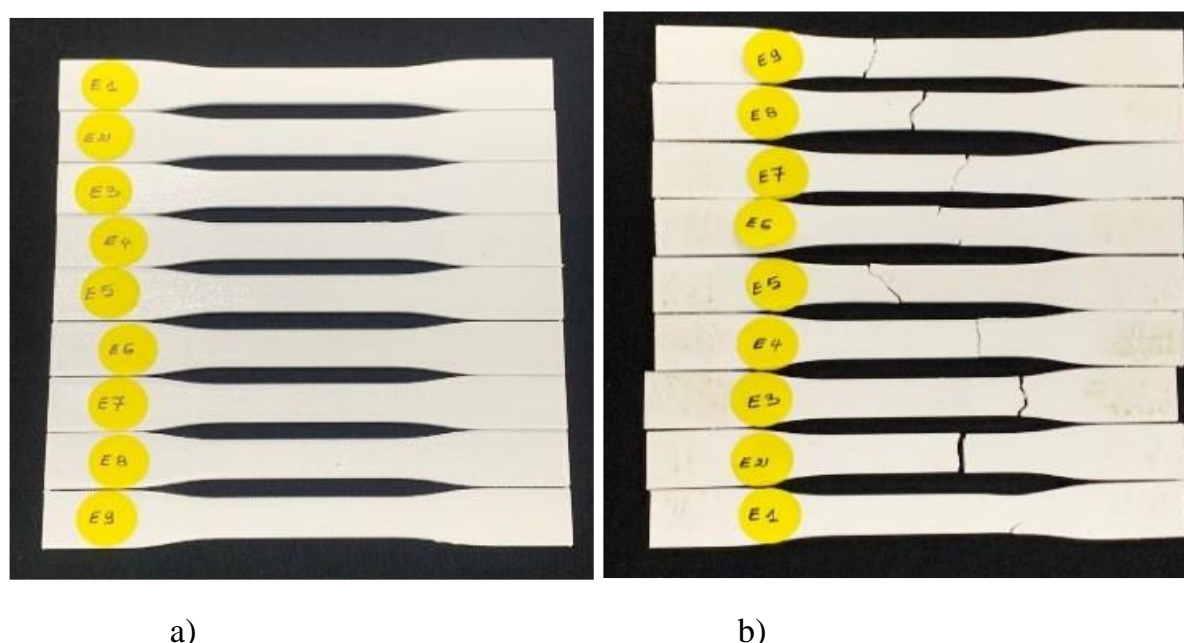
(a) The appearance of the printed tensile test specimens, (b) Images of PLA specimens after tensile test.
